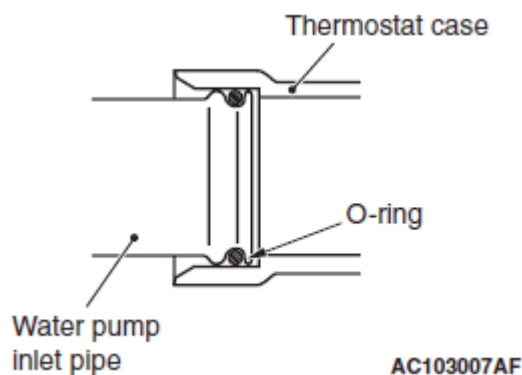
Identifying O-Ring And Water Pump Inlet Pipe
